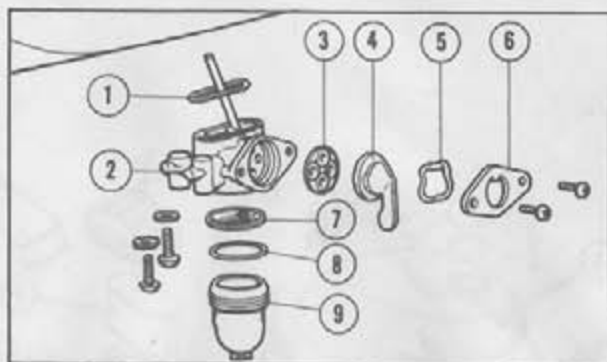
(1) 23 mm O-ring (2) Fuel valve body (3) Valve gasket (4) Fuel valve lever (5) Valve lever spring (6) Setting plate (7) Screen (8) O-ring (9) Strainer cup
